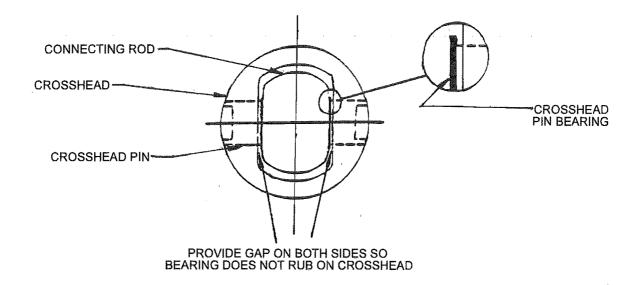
CENTERING CONNECTING ROD IN CROSSHEAD
